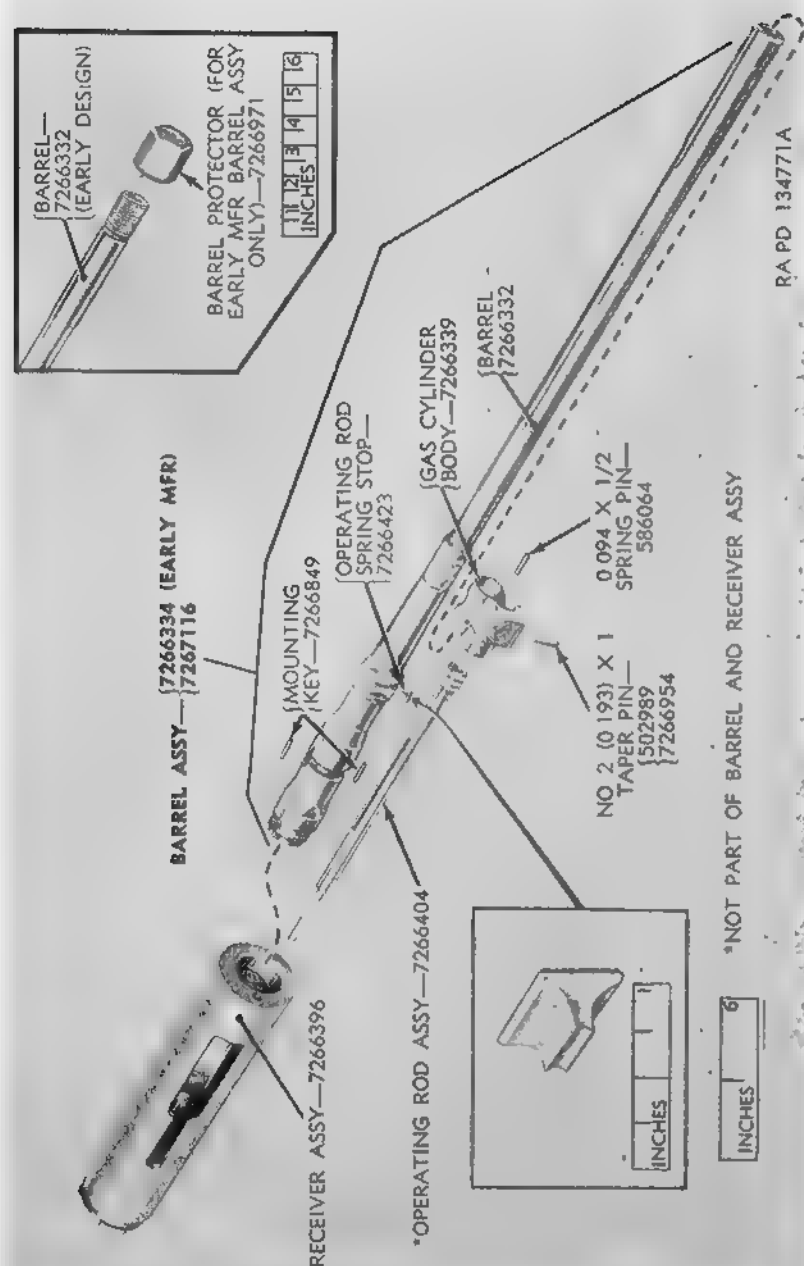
Barrel and receiver assembly 7266397—exploded view.
